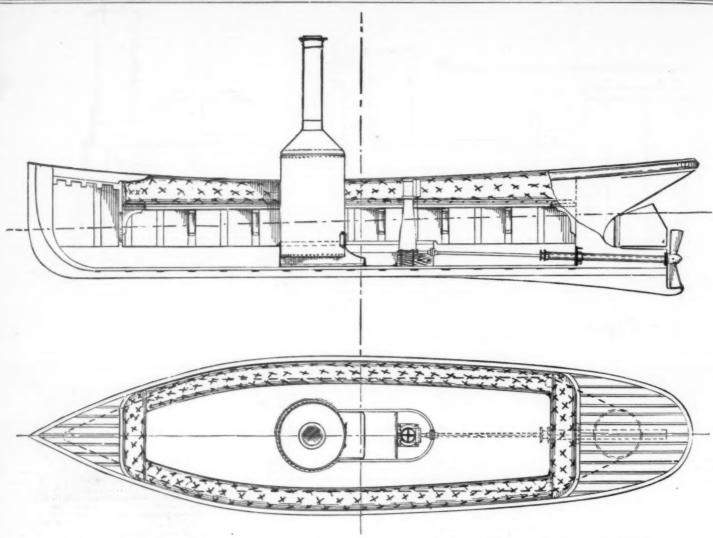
PLAN AND ELEVATION OF A SMALL STEAM YACHT. BY M. A. BECK.
